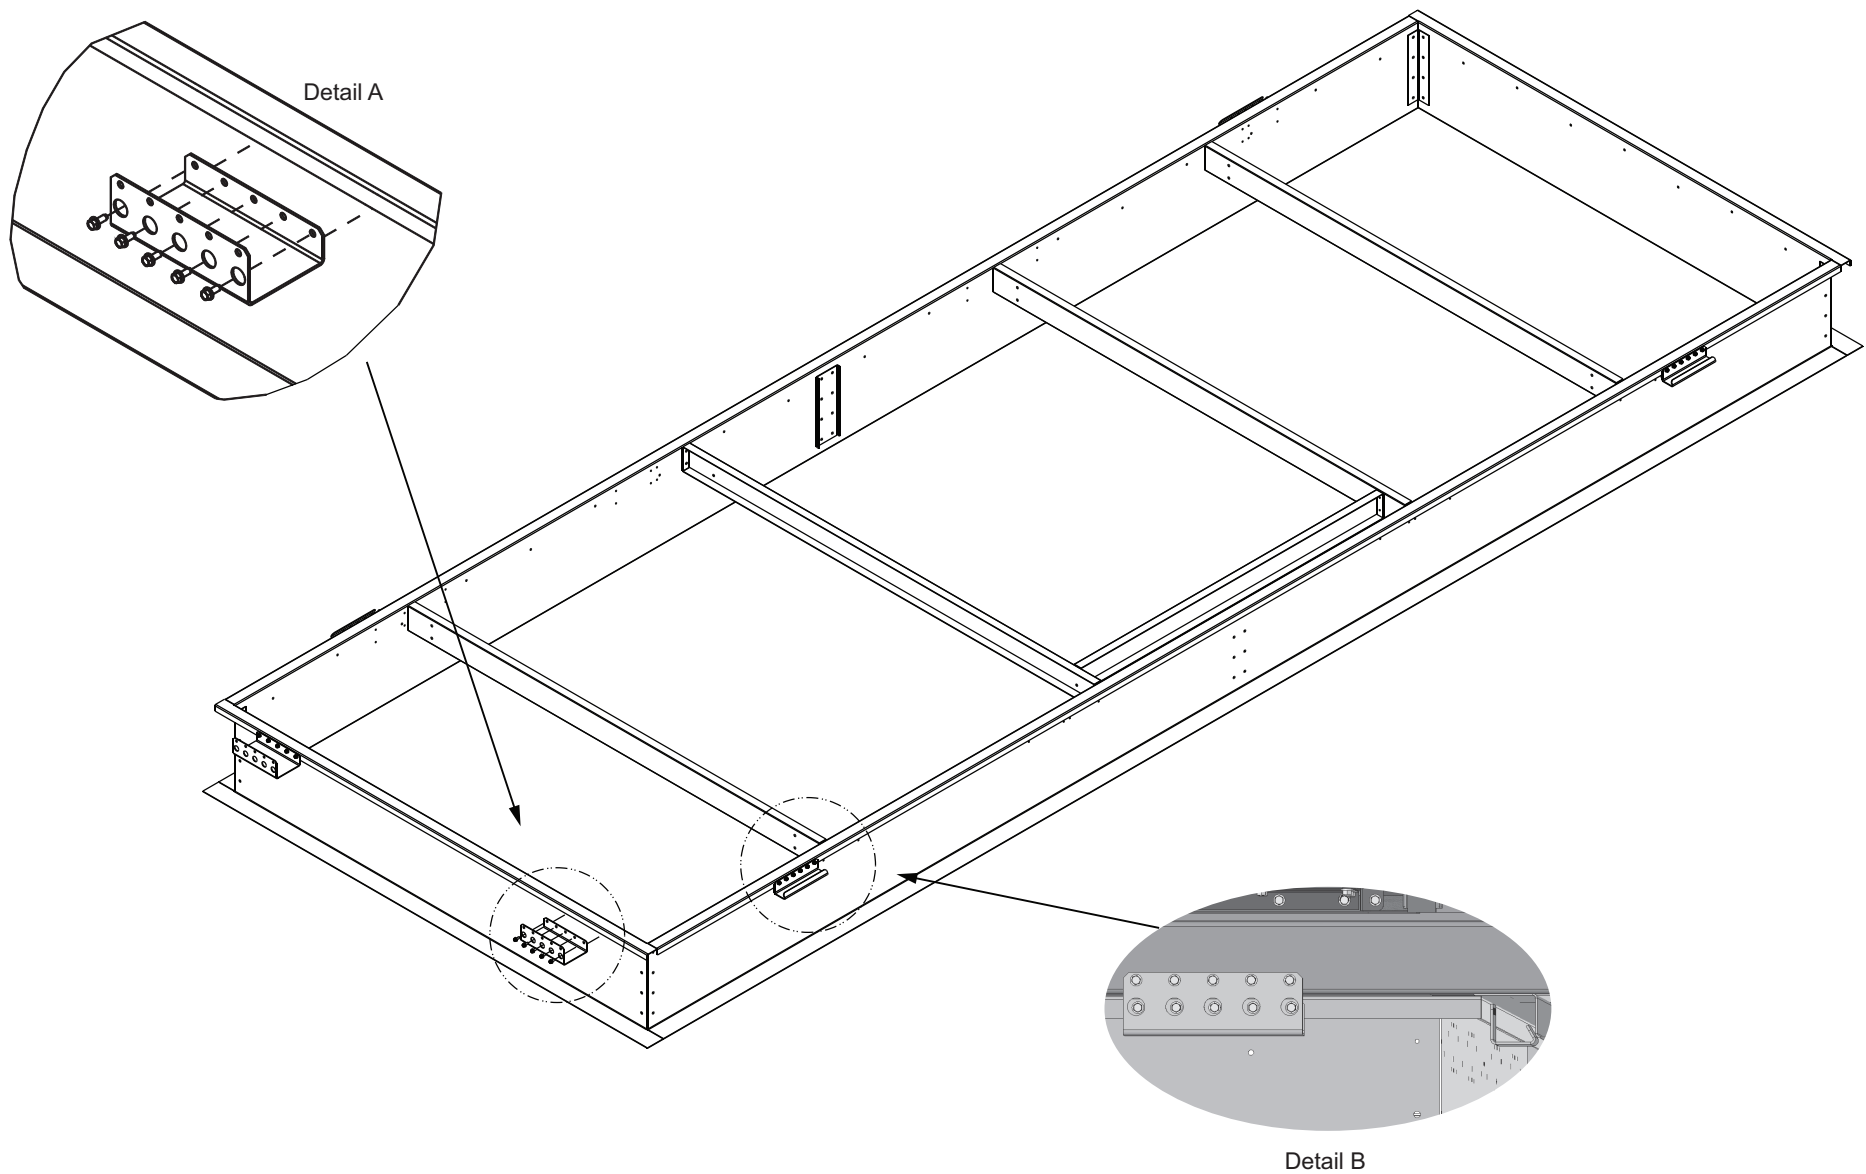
CRCNTRKT010A00 — End and Side Bracket Positioning
